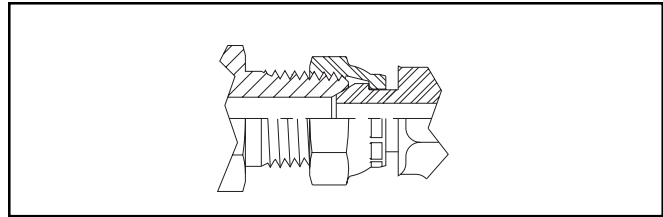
Illustration showing how NPSM swivel adapters seal on mating chamfer in male pipe thread.
